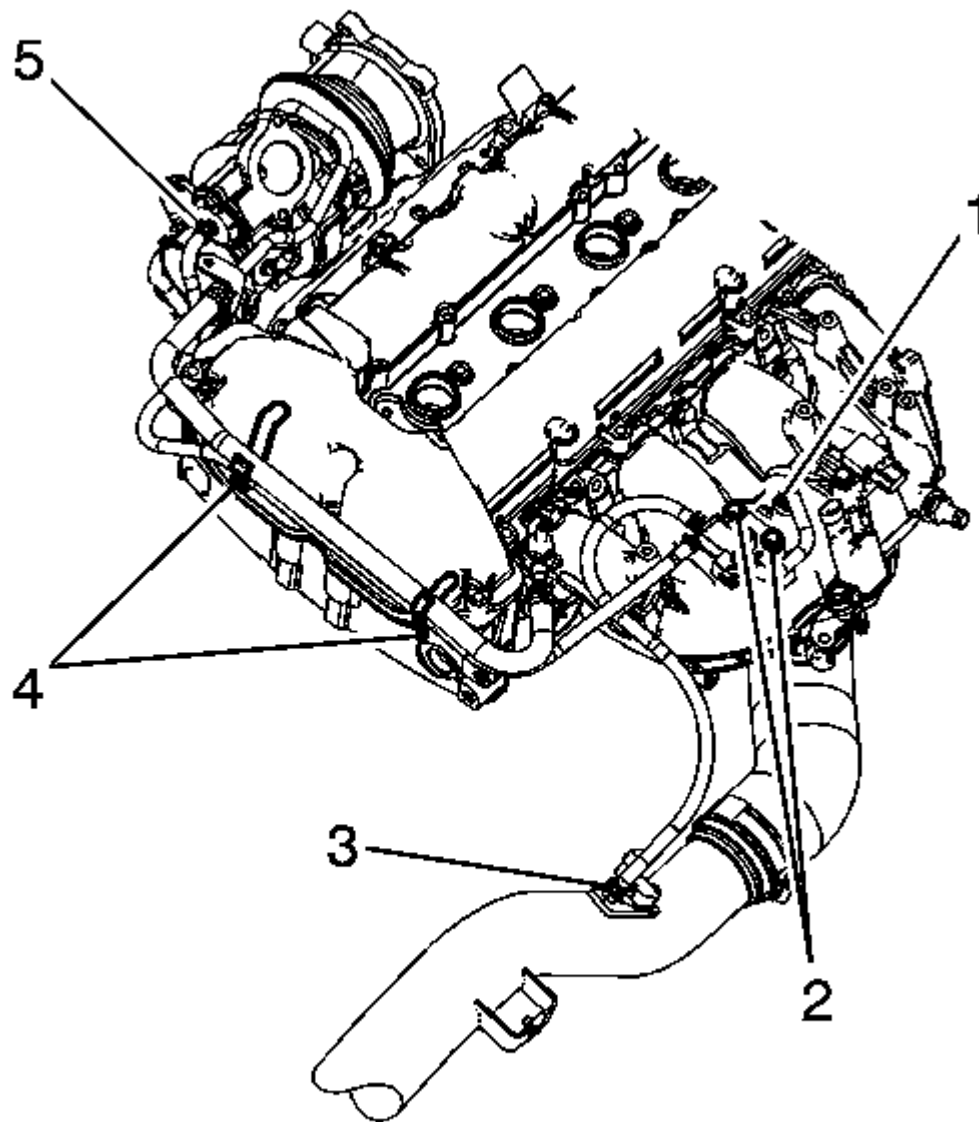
Identifying Charge Air Bypass Solenoid Components
